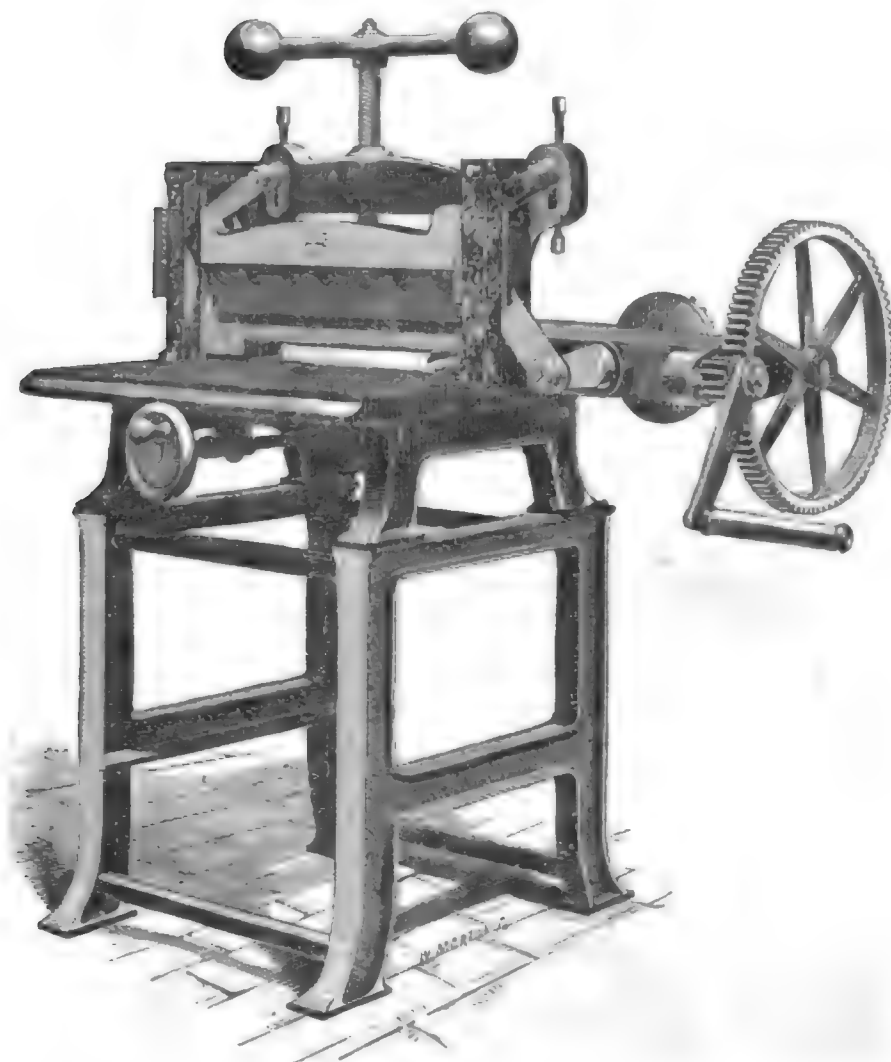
Furnival's New Patent Universal Job and Label Cutting Machine.
